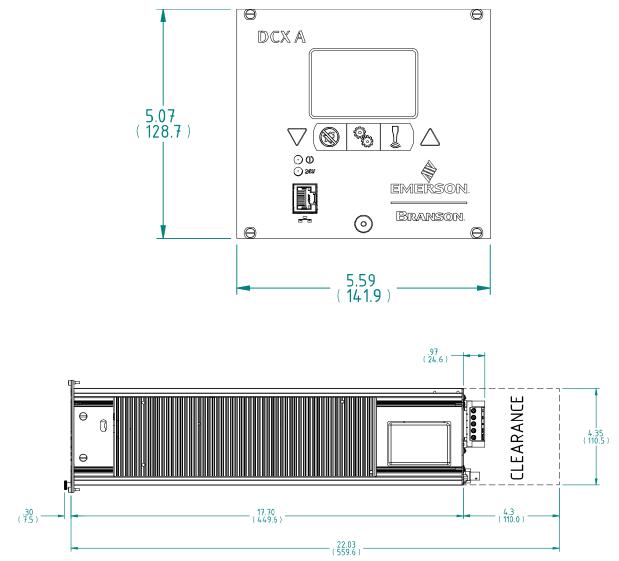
DCX A Power Supply Dimensional Drawing (Medium)
